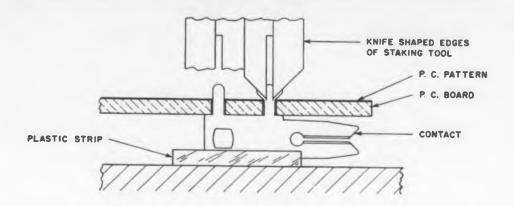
Contact is mounted through holes in the printed circuit board. Tests have shown that 45 lbs. applied to the contact axis will not loosen it from the board.
